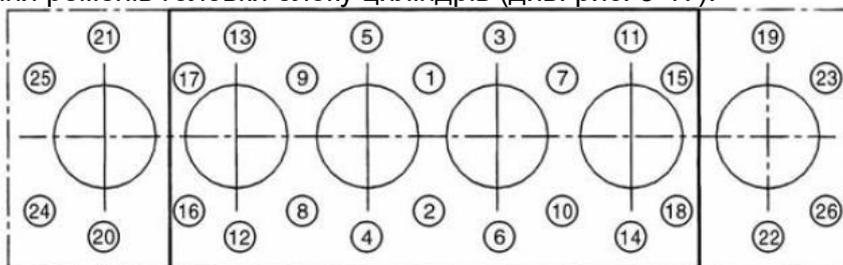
Sequence for Tightening Cylinder Head Bolts
